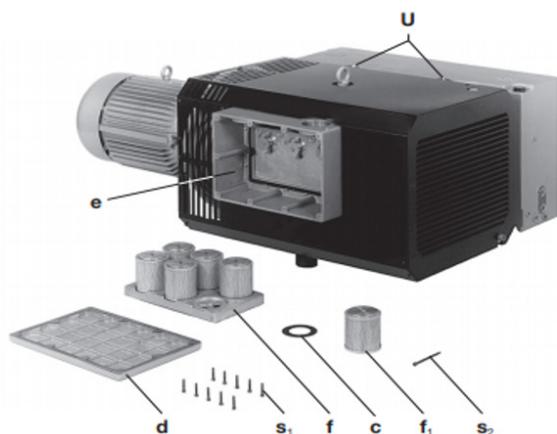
KVO-400 – KVO-1300 air filtering.
